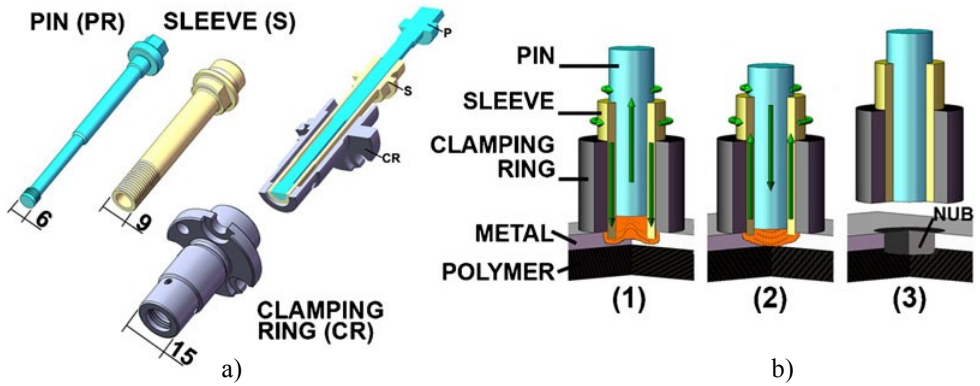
Schematic showing the principle of friction spot joining welding: Friction spot joining tool assembly b) An illustration of friction spot joining welding process [31].
